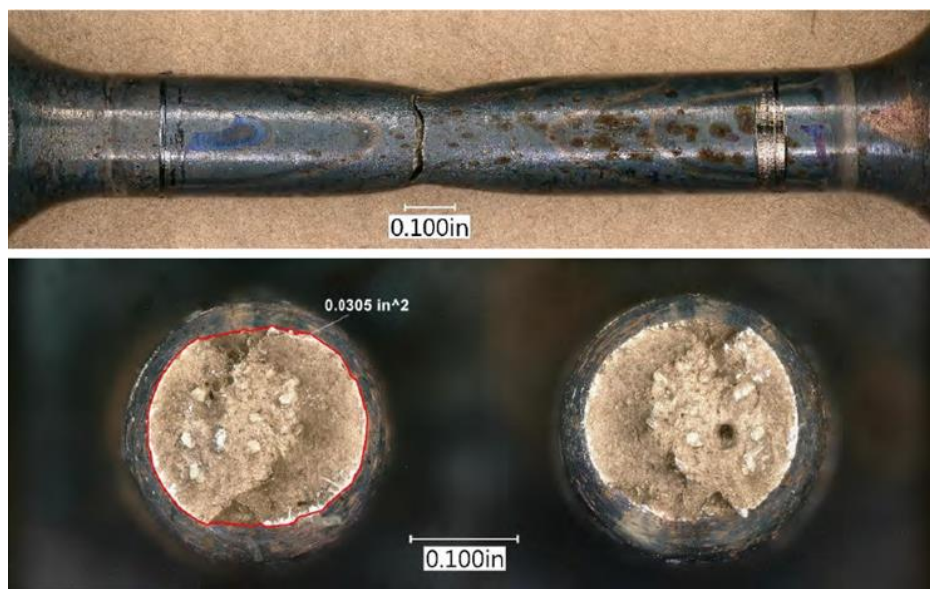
Photographs of Tested Tension Test Specimen QT-17 and Corresponding Fracture Surfaces – Base Metal Plate, Heat No. B4197-2, Transverse Orientation, 200°F
